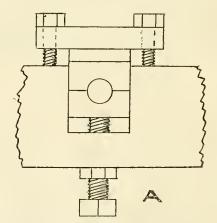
FORM OF ADJUSTMENT OF CUTTERS EMPLOYED BY MESSRS. GREEN ON THEIR OLDER MACHINES.
